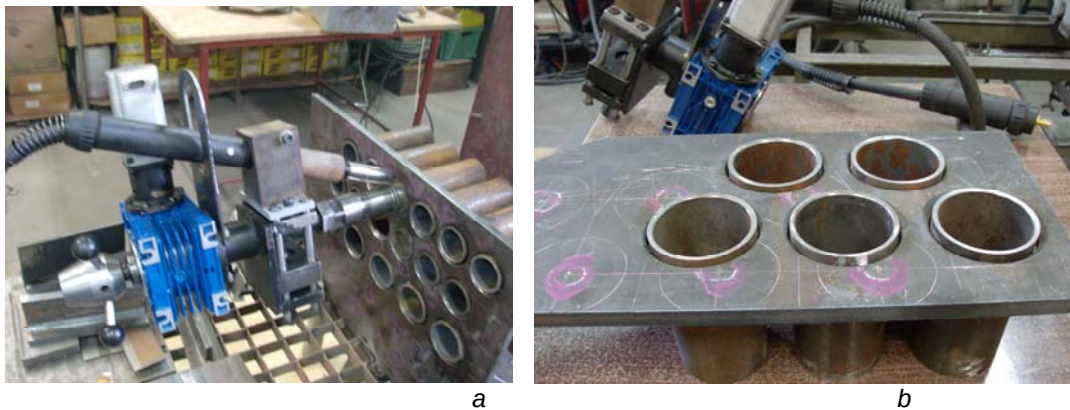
Orbital welding: a- setting appliance; b-sample test.
